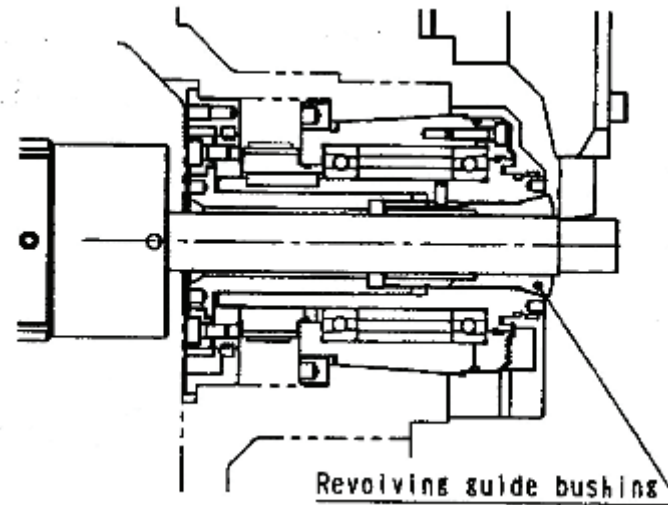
Rotary Guide Bush Type must install 2 to 4 Ball Bearings
